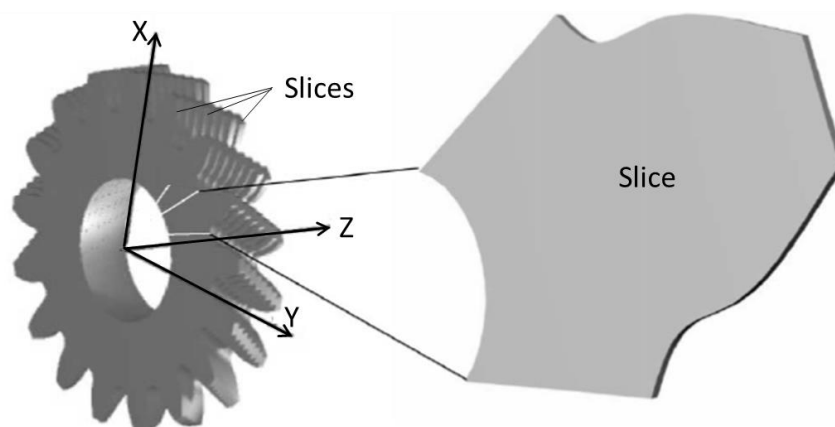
Schematic of slicing approach of helical gears, adapted from [33]
